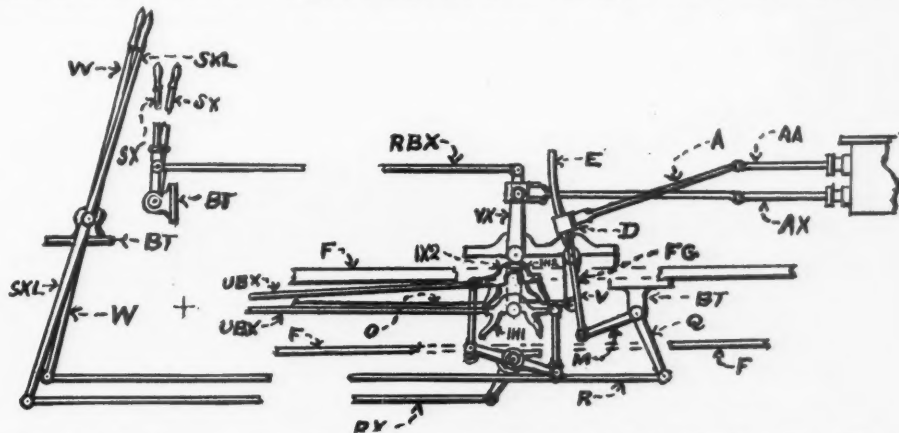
Form of Cuyahoga Valve Gear Used on Two Seth Wilmarth Locomotives; 1852.
